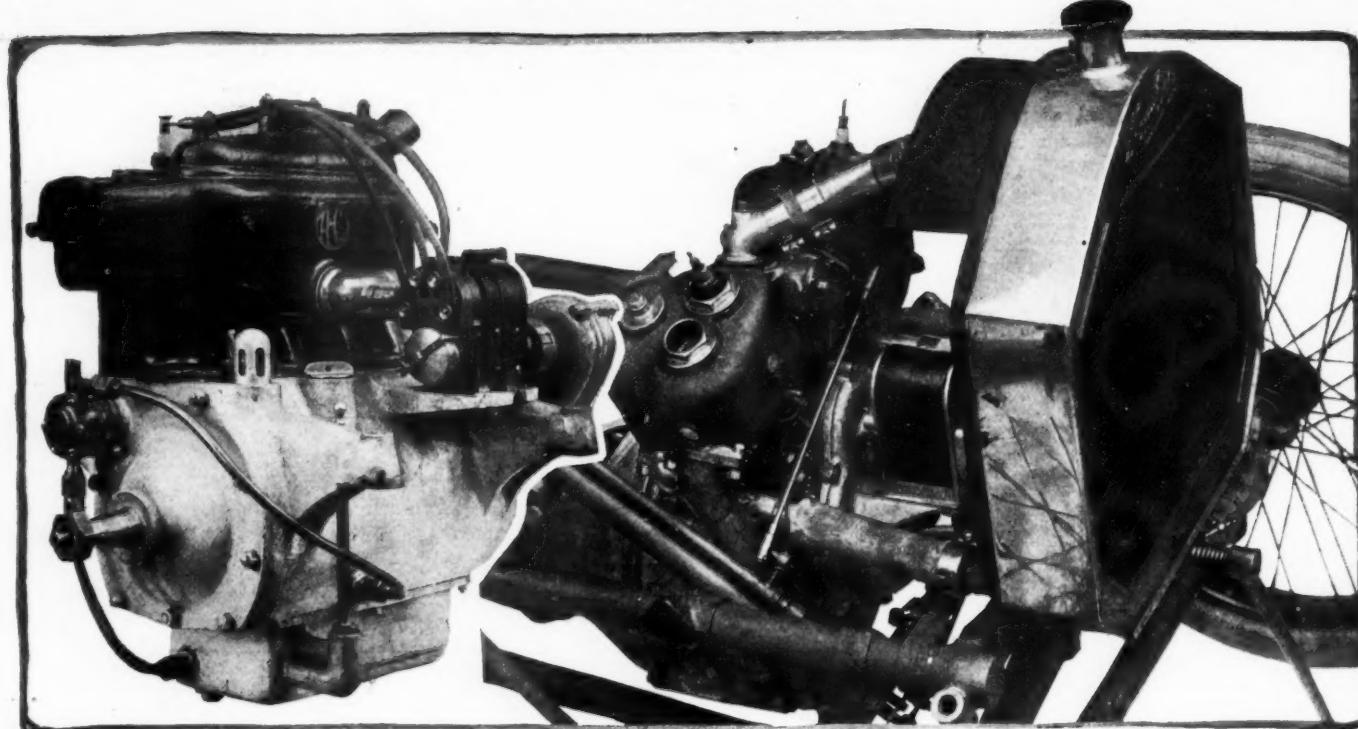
At left—Four-cylinder motor of Auto-Carrier chassis with cylinders 59x100 mm. At right—Two-cylinder twin motor 84x90 mm. on Humber car. Gearbox is unit with motor, both being carried direct on tubular frame
